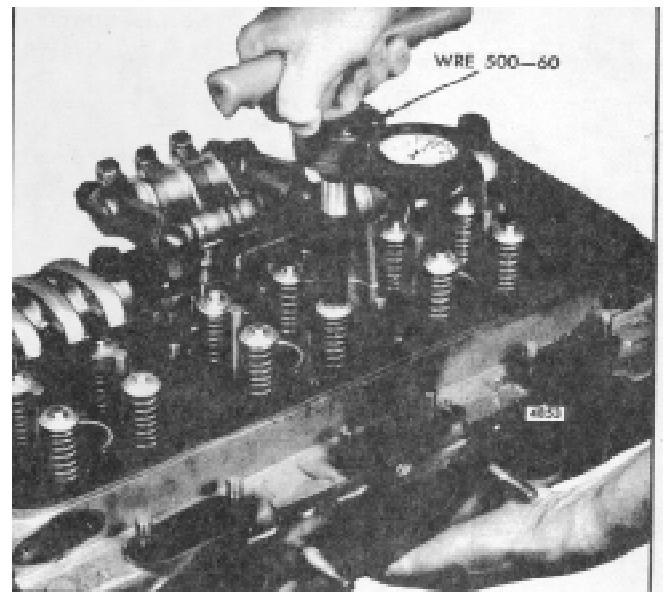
Checking Pressure Required to Open the Exhaust Valve in Cylinder Head
